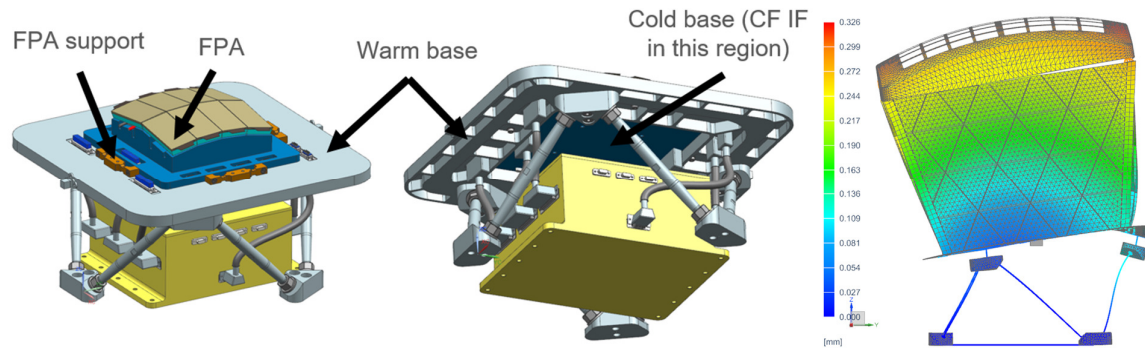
Left & middle: Focal Plane Assembly Cold Base and Warm Base. Right: Example of the mechanical analysis (first mode) performed on 1 SXI module.
